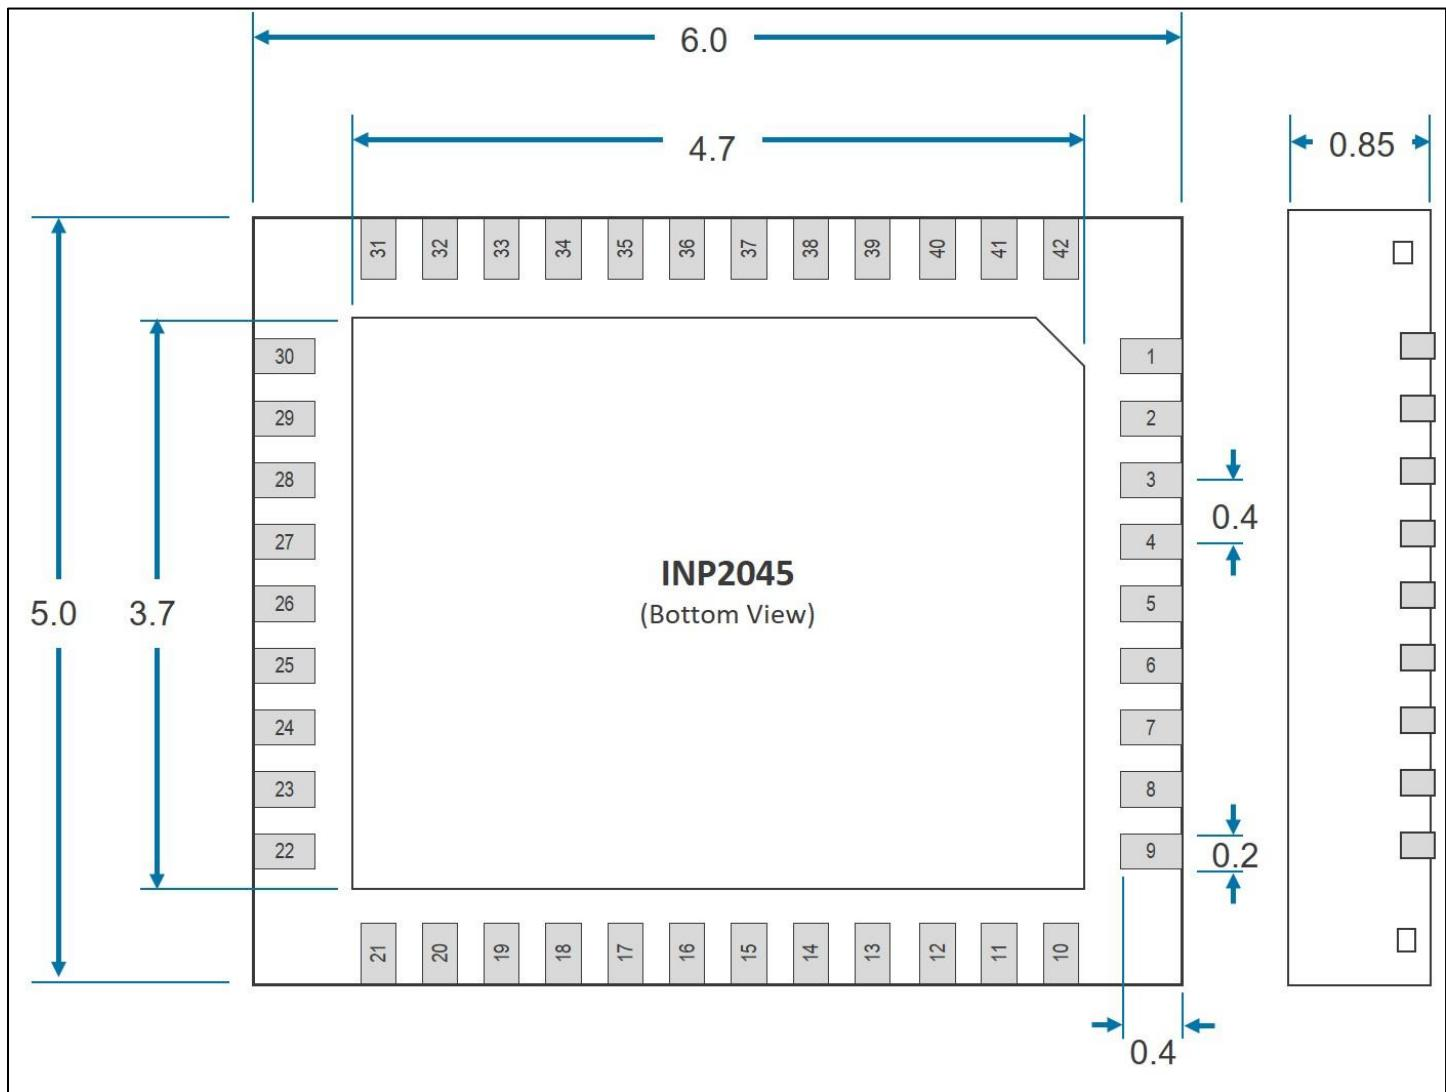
INP2045 SoC Chip Pin Out and Dimensions
